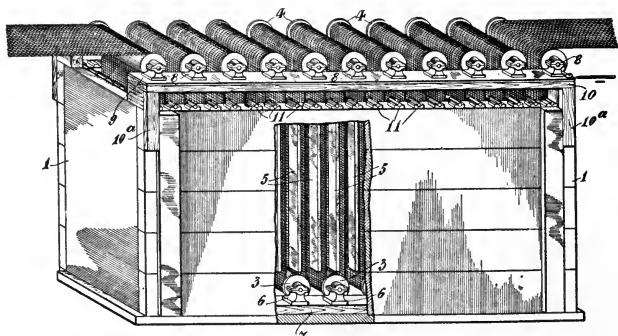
PERSPECTIVE VIEW OF ROOT WIRE CLOTH MACHINE
